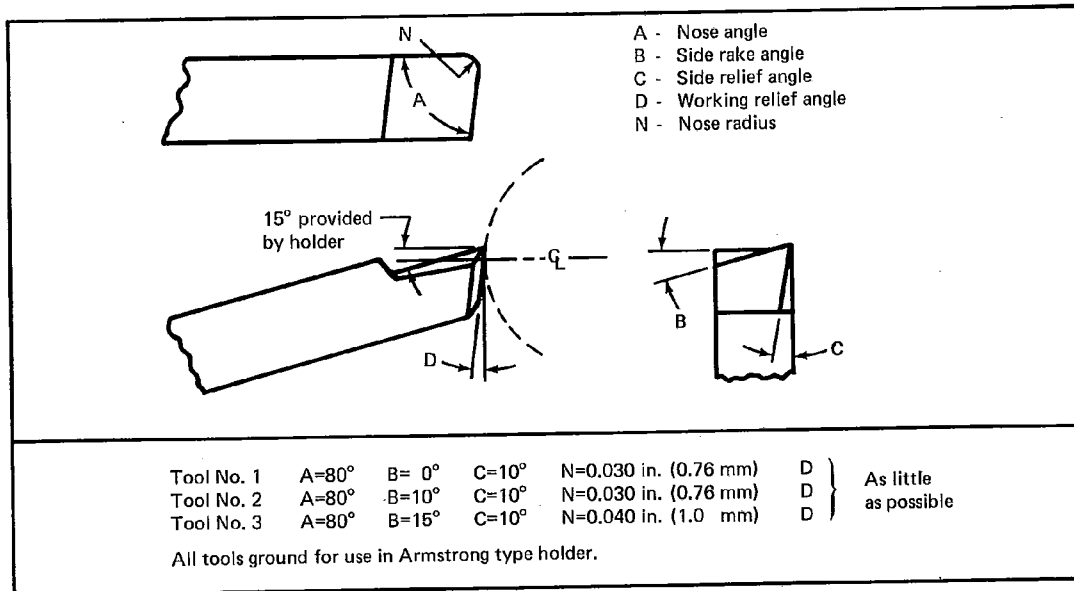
B — High speed tool bits ground at angles recommended for machining sprayed metal
